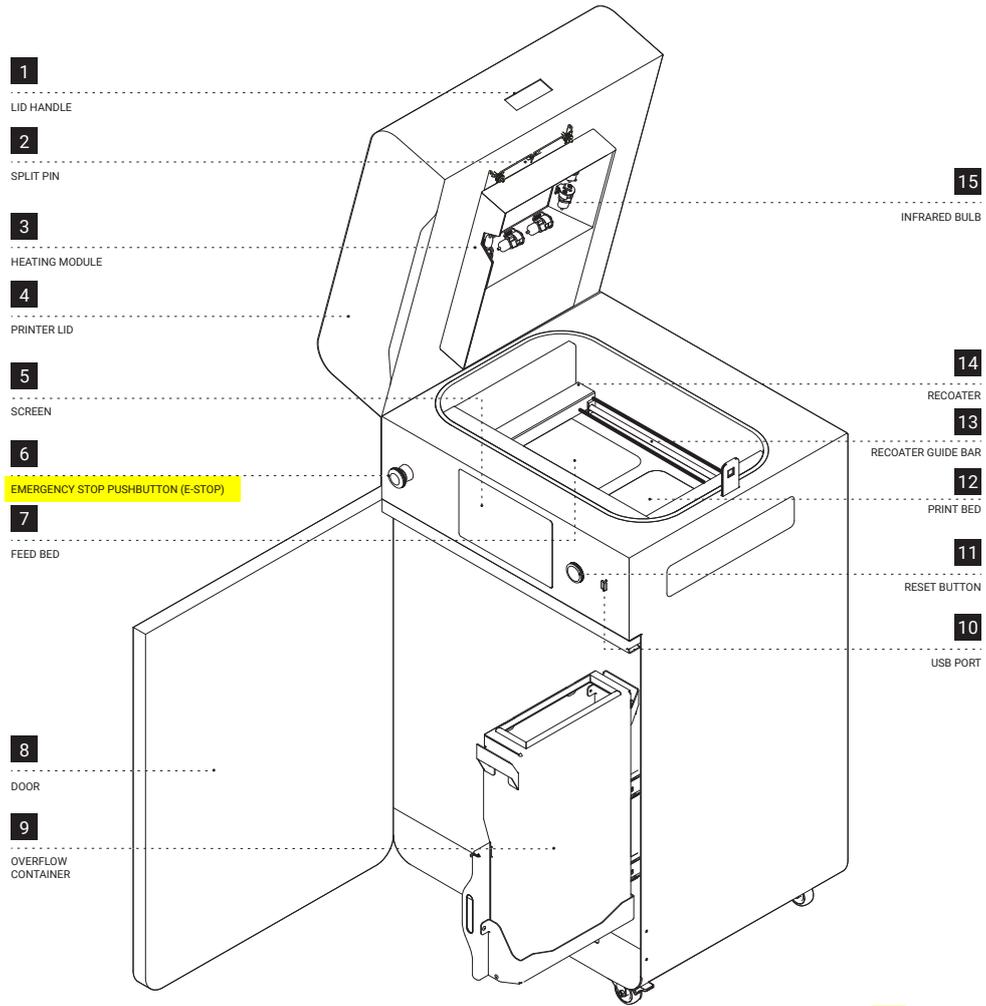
View of the front of the printer, heating module, print chamber, and overflow bin.
